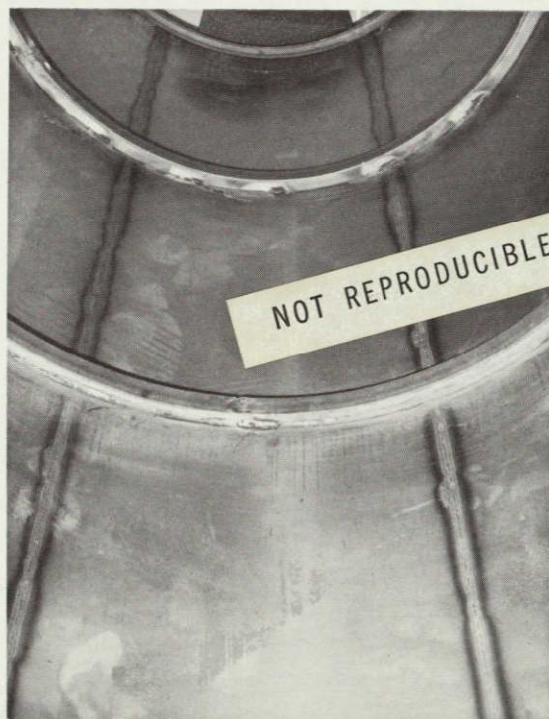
INSIDE OF CYLINDER SHOWING RINGS
